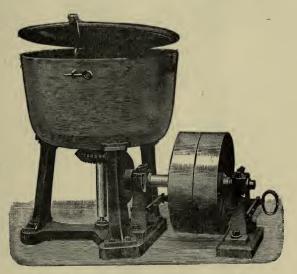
Braun's Oval Crushing Mill for Coring Mixture.
